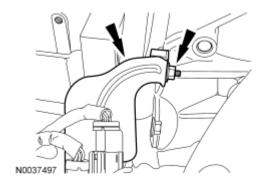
Locating Transaxle Control Electrical Connectors Courtesy of FORD MOTOR CO.
